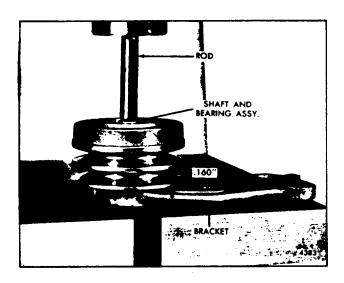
Installing Shaft and Bearing Assembly and Pulley in Bracket
